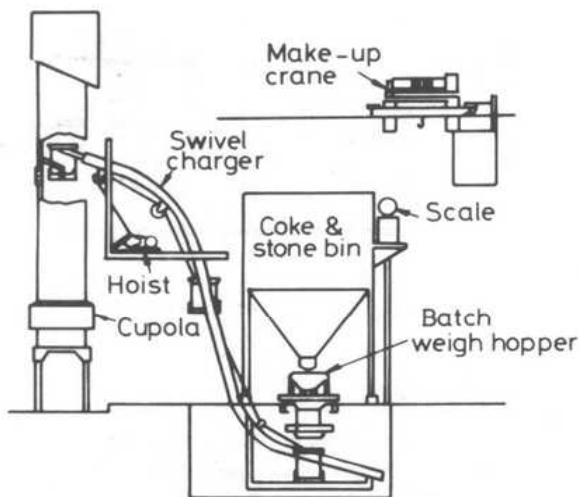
Make-up crane and weigh hopper used with swivel bucket charger.
